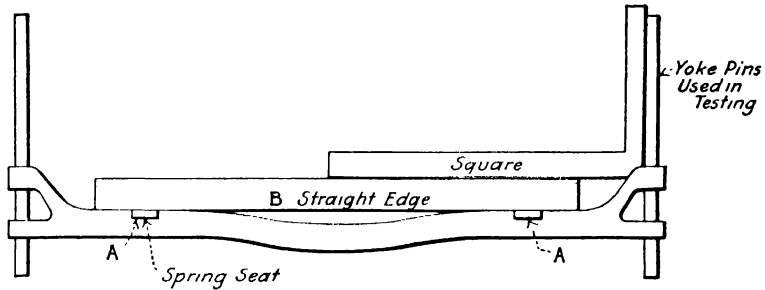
Front Elevation of Front Axle Showing Method of Checking Front Axle for Vertical Bends.
